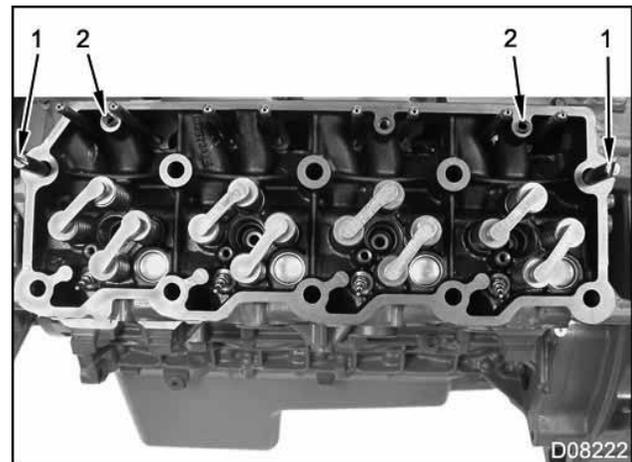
Alignment guides and dowel sleeve bushing in 2005 Model Year cylinder head (Two tapped M8 holes)
